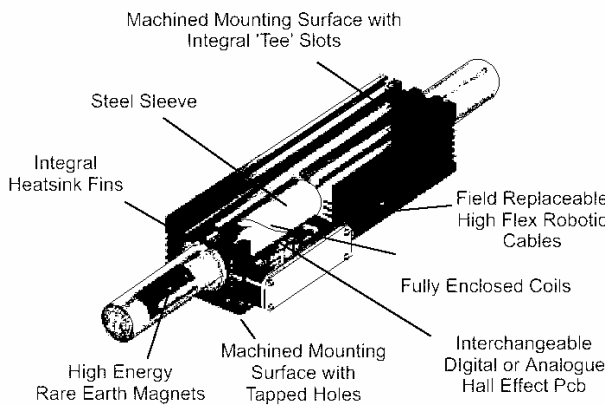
linear motor - basic design (adapted manufacturer spreadsheet)
